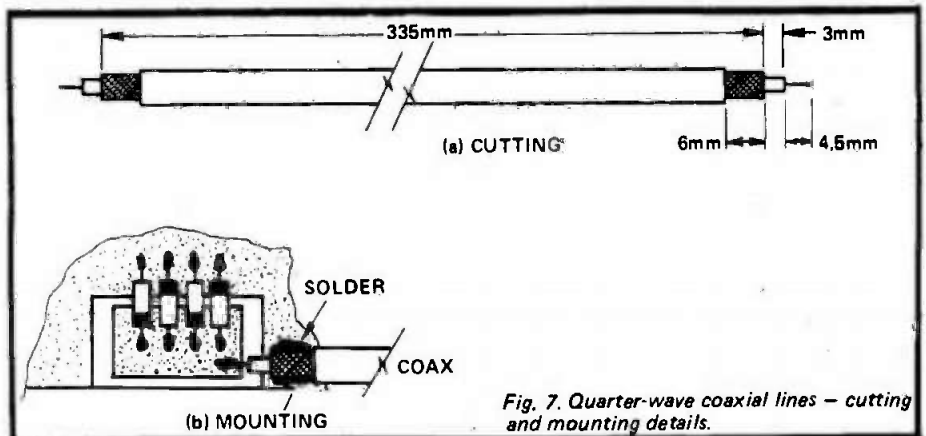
Quarter-wave coaxial lines - cutting and mounting details.
